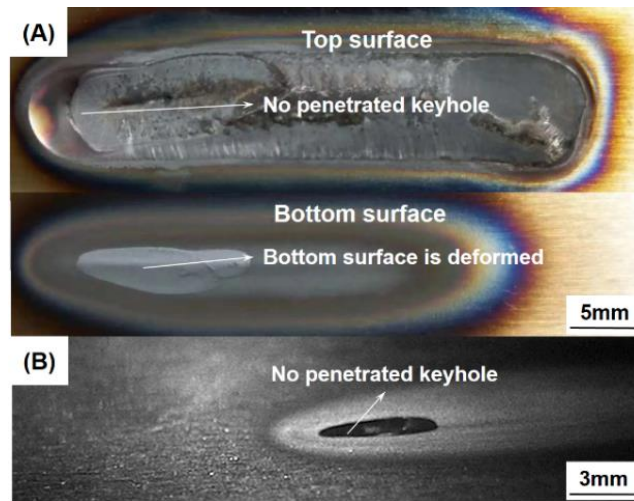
Weld bead formation with low plasma gas rate (2.0 L/min): (A) Top surface; (B) Bottom surface; (C) The high speed photography of the bottom surface
